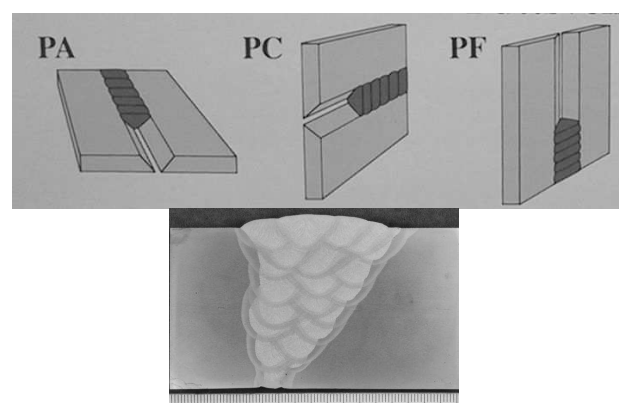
Three different welding positions for weldability testing of Steel Grade S420G2 and utilised weld cross-section [I. M. Kulbotten, StatoilHydro ASA, 2008, Low temperature properties of welded constructional steel]
